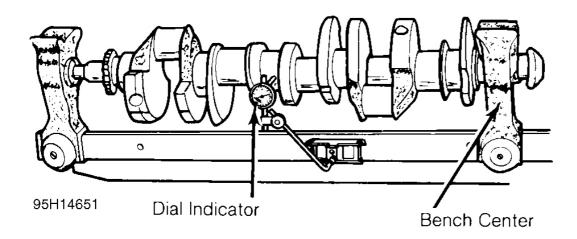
Measuring Crankshaft Main Bearing Journal Runout
